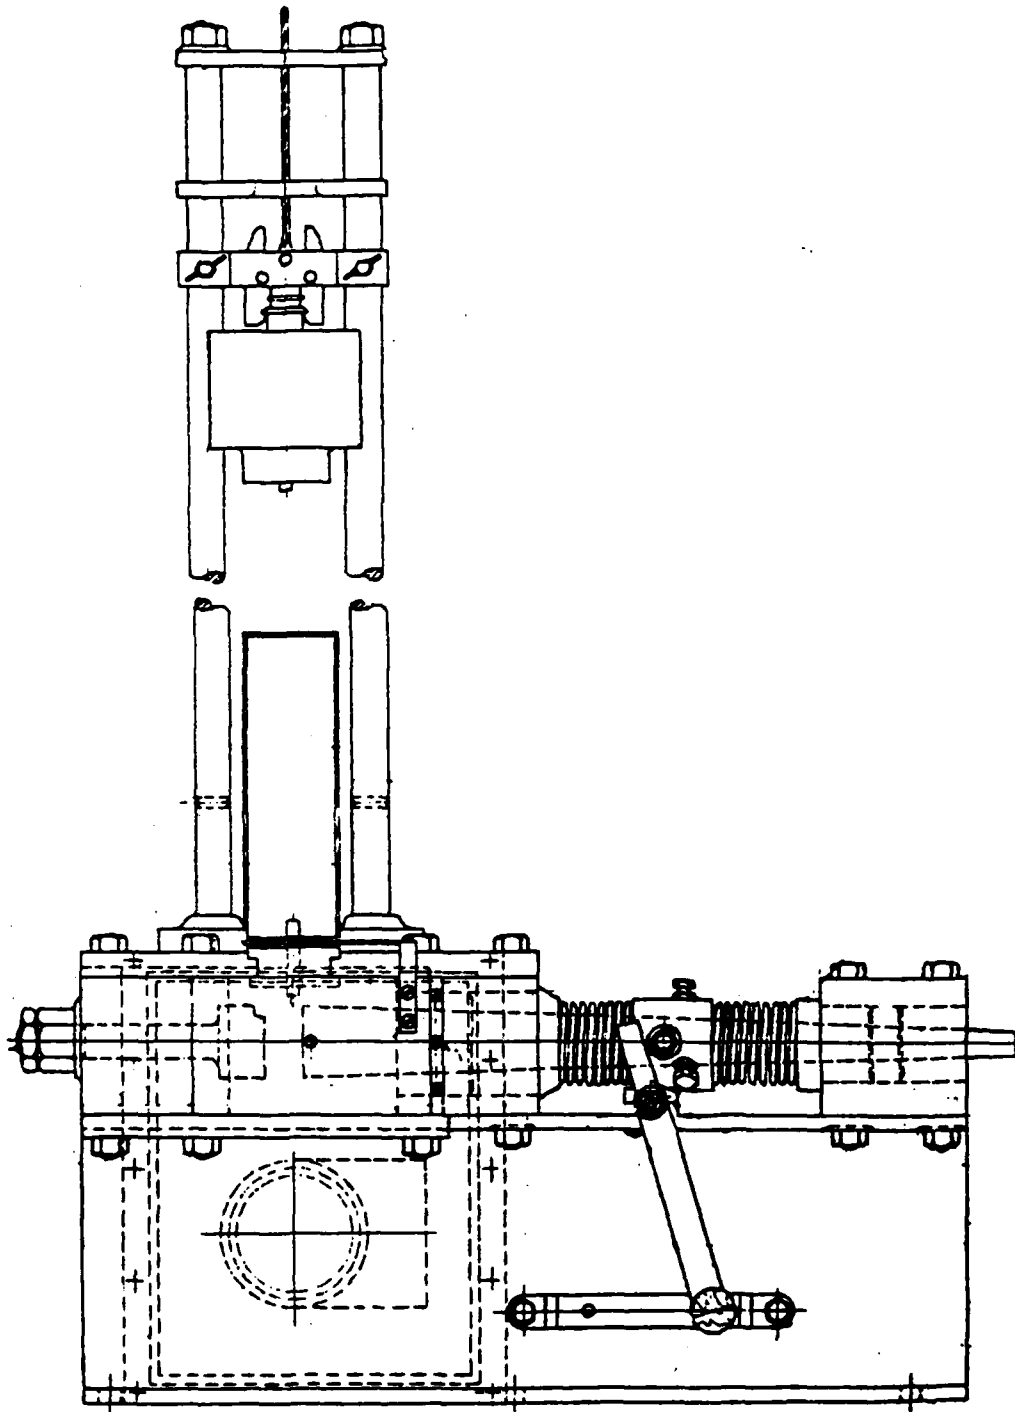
General assembly - radial pressure bar; pre 1945 equipment (pendulum not shown).
